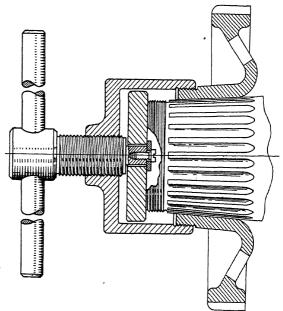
WITHDRAWING REDUCTION GEAR DRIVING WHEEL FROM FRONT END OF CRANKSHAFT.
